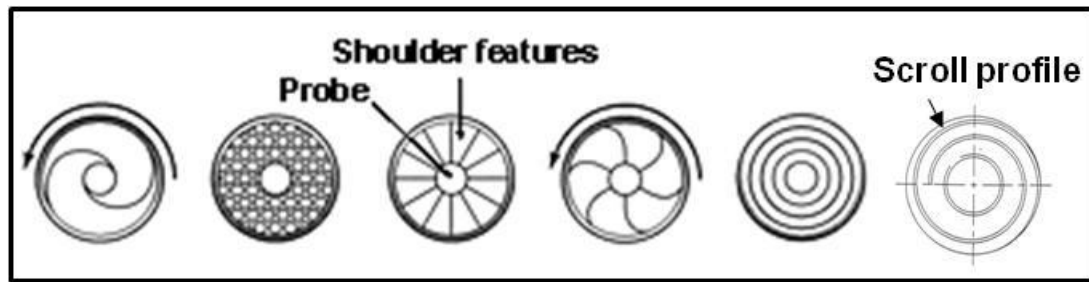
, FSW Tool Shoulder Profiles Viewed from Beneath [33], Including Scroll Profile [34].
